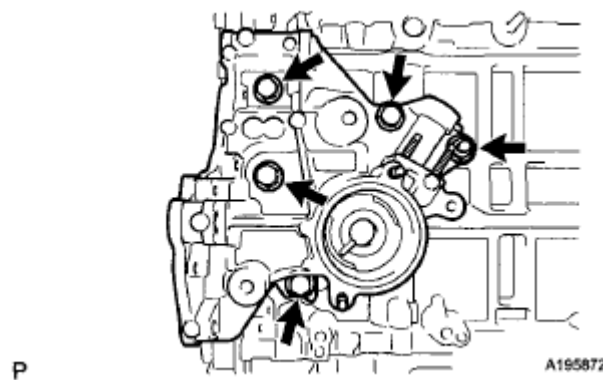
Locating Inlet Water Housing Bolts And Nut
